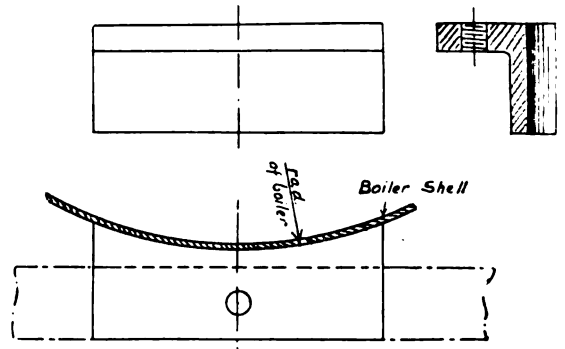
CASTING TO SECURE THE BOILER TO THE MAIN FRAME. (Two thus: Full size.)
